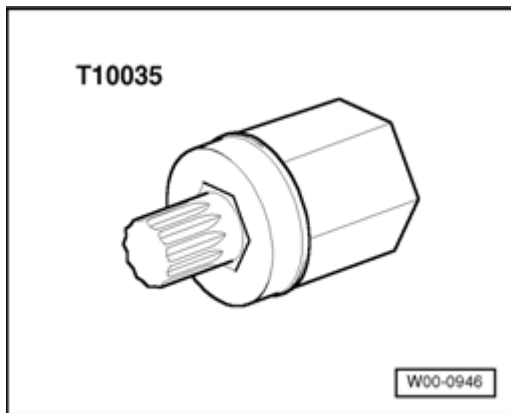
Identifying Special Tools - Timing Chains, Removing From Camshafts And Chain Tensioner, Removing And Installing
